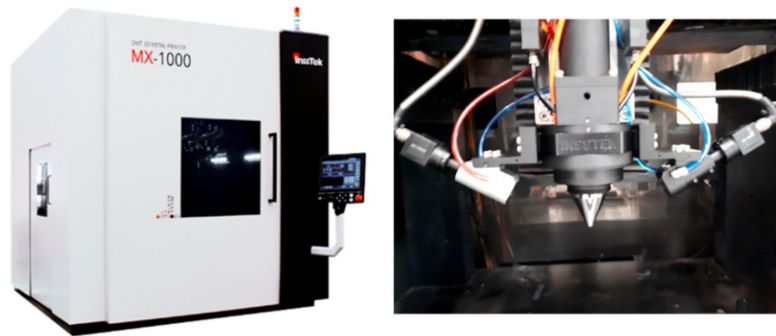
Insstek® MX-1000, a Direct Metal Tooling (DMT) metal 3D printer.
